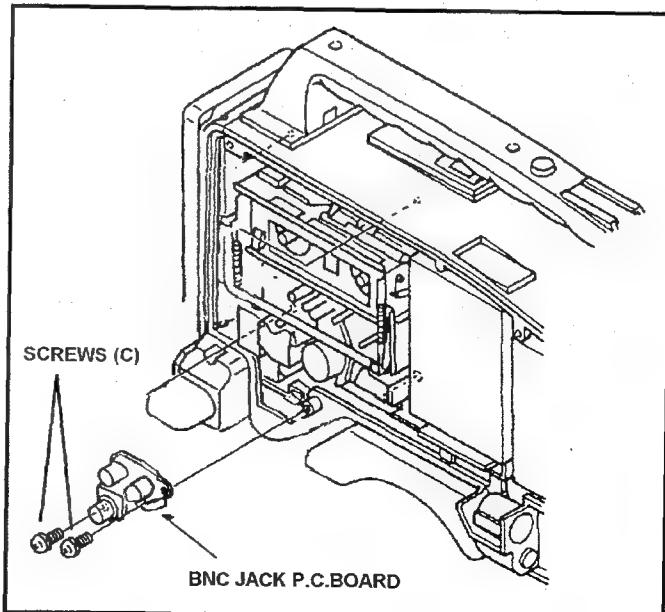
Removal of BNC JACK P.C. Board
